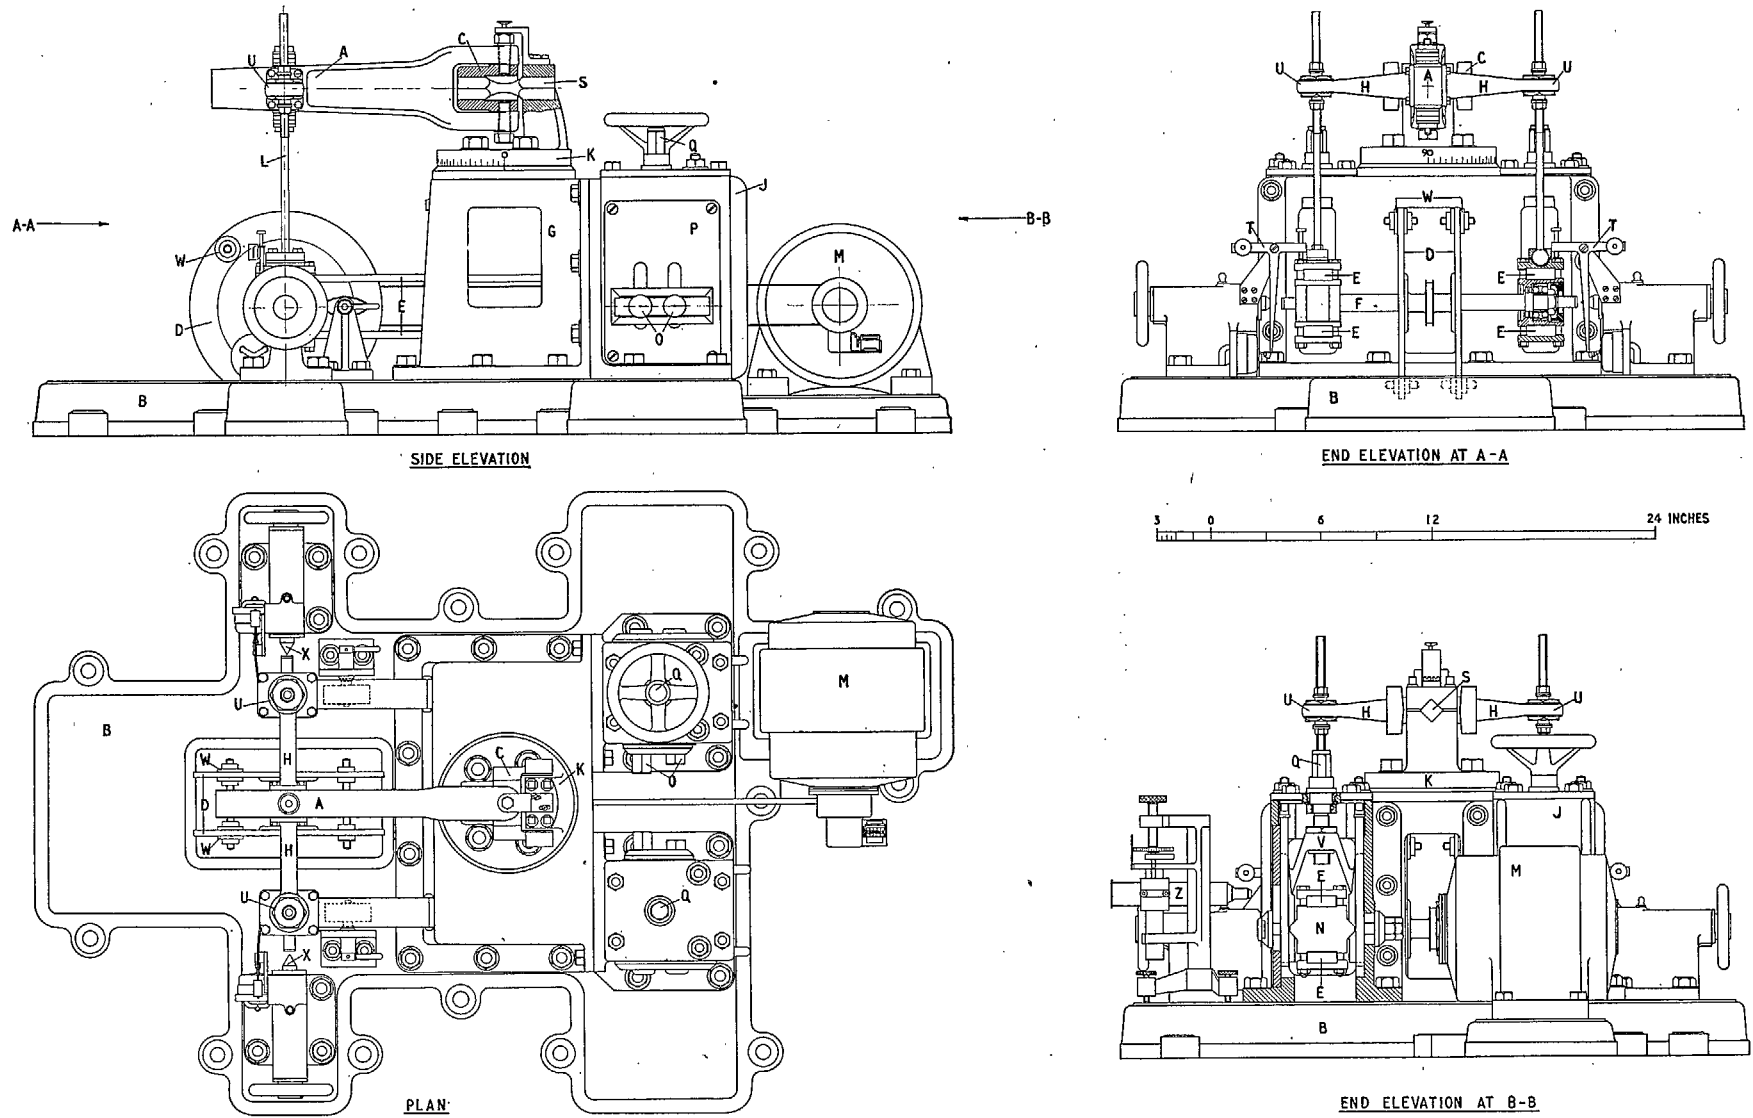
General Arrangement of No. 2 Combined Stress Fatigue Testing Machine.
